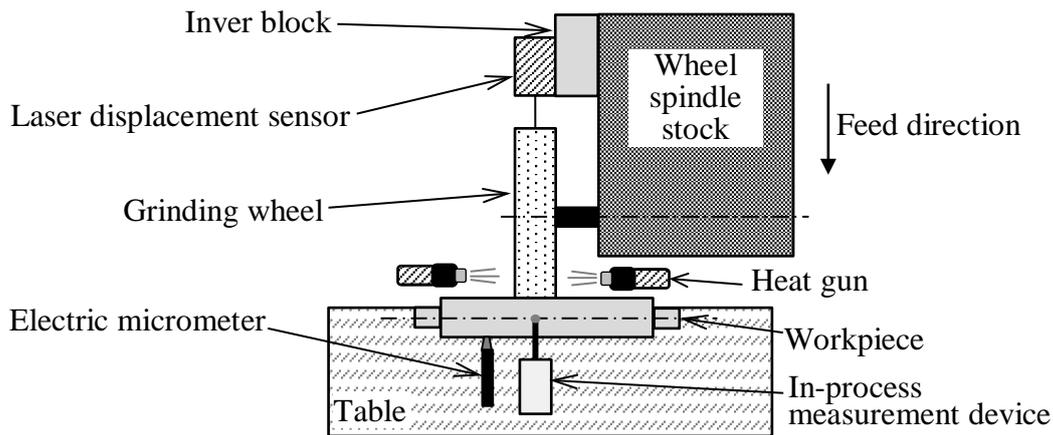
Schematic diagram of cylindrical grinding machine equipped with measuring devices
